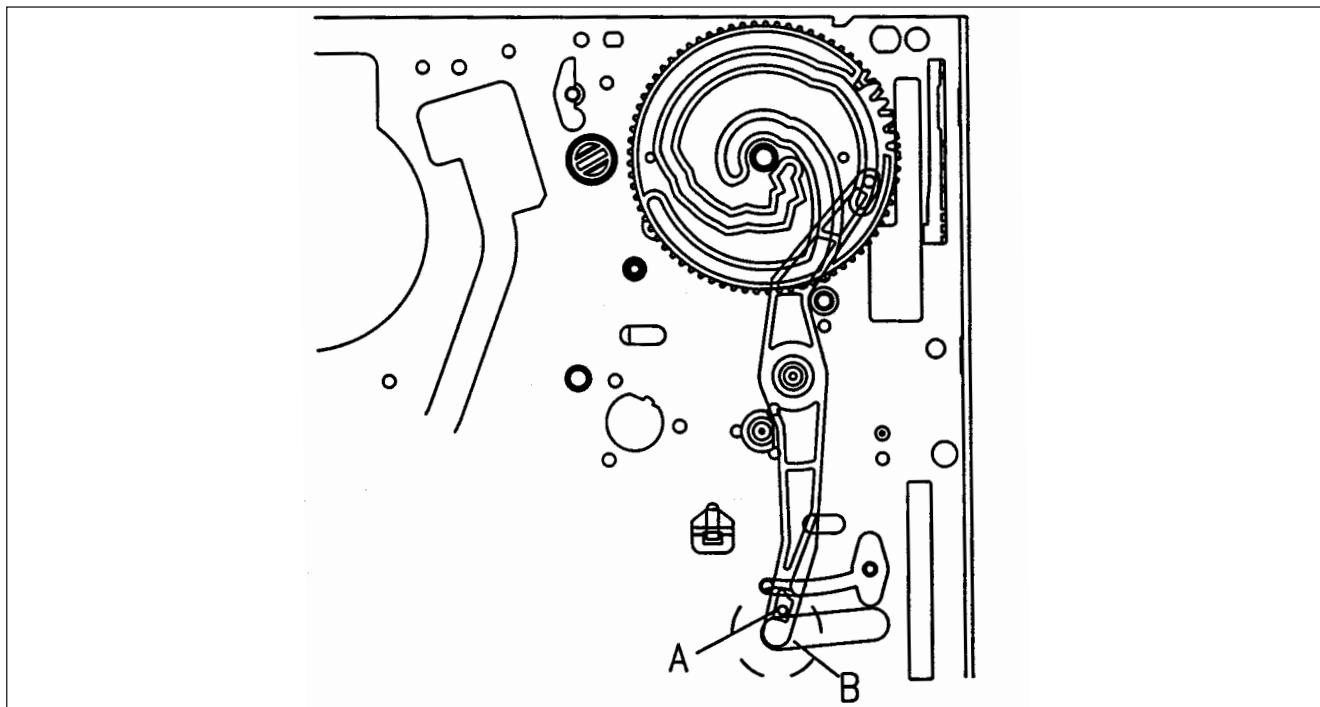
Mechanical Checks/relay Lever and Cam Gear Alignment
